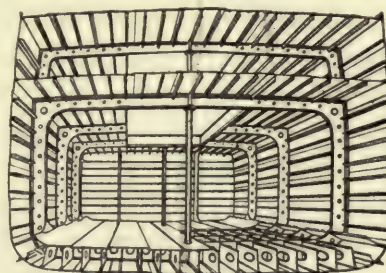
LONGITUDINAL FRAMED SHIP: CLEAR HOLD.
